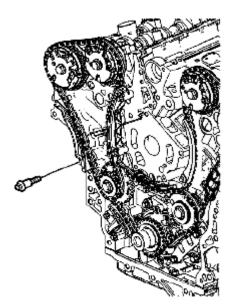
Identifying Right Secondary Camshaft Drive Chain Tensioner Gasket Courtesy of SUZUKI OF AMERICA CORP.
